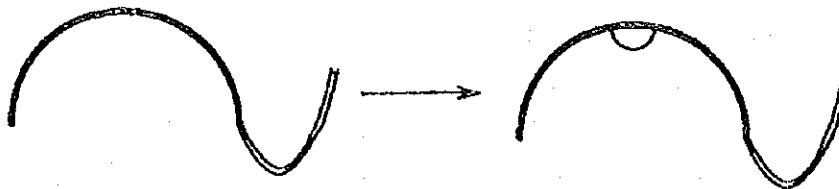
A projection for the Hook Spring Welding Process
